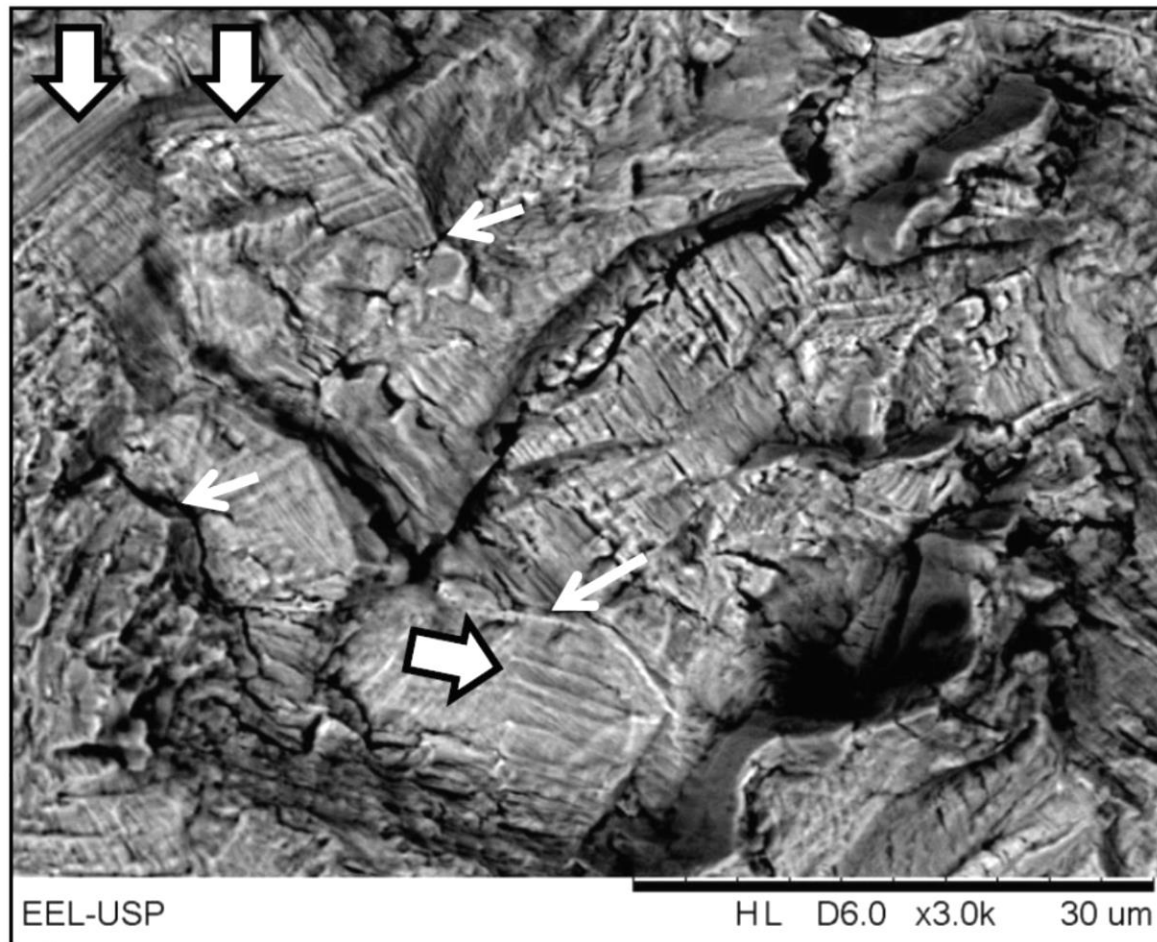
Fracture surface near the origin B (Fig 2.1) showing slip bands (Thick white arrows), intergranular secondary cracks (thin arrows). Intergranular fracture mechanism and fatigue striations.
